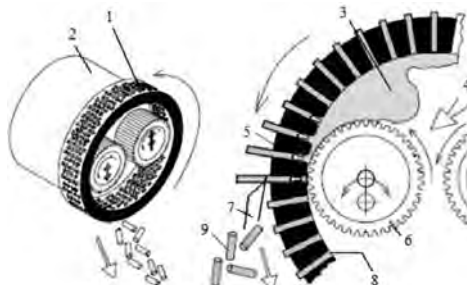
Ring die of pellet mill: 1-ring die; 2-gear; 3-crushed material; 4-material input; 5-die; 6-roller; 7-cutter; 8-pellet compressing hole; 9-pellet. [23], [24]
